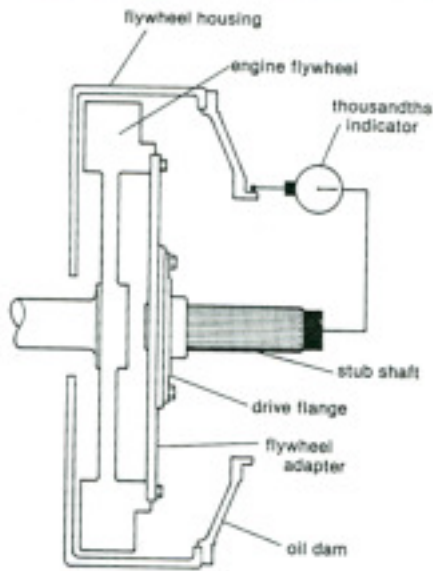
Dial Indicating Oil Dam Pilot O.D.
